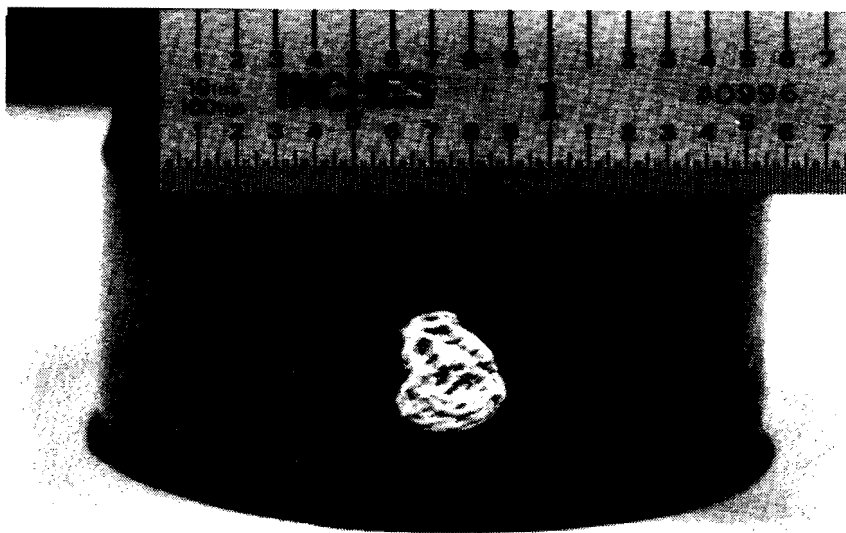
42-Degree Gearbox -500-6 Gear Output Gear Roller Bearing
